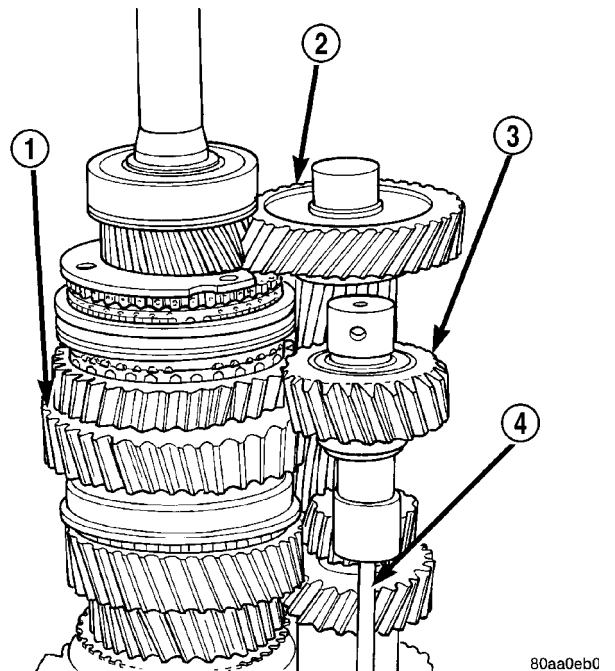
REVERSE IDLER ASSEMBLY POSITION
